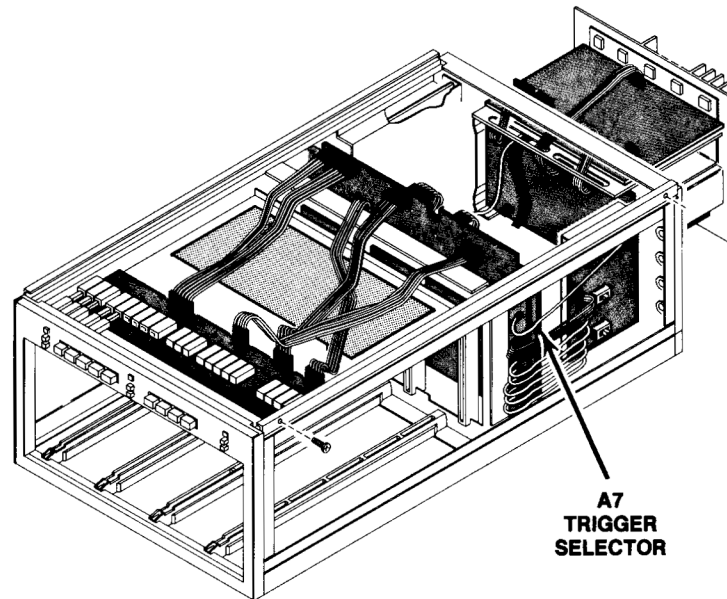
A7-Trigger Selector Circuit Board Assembly.
